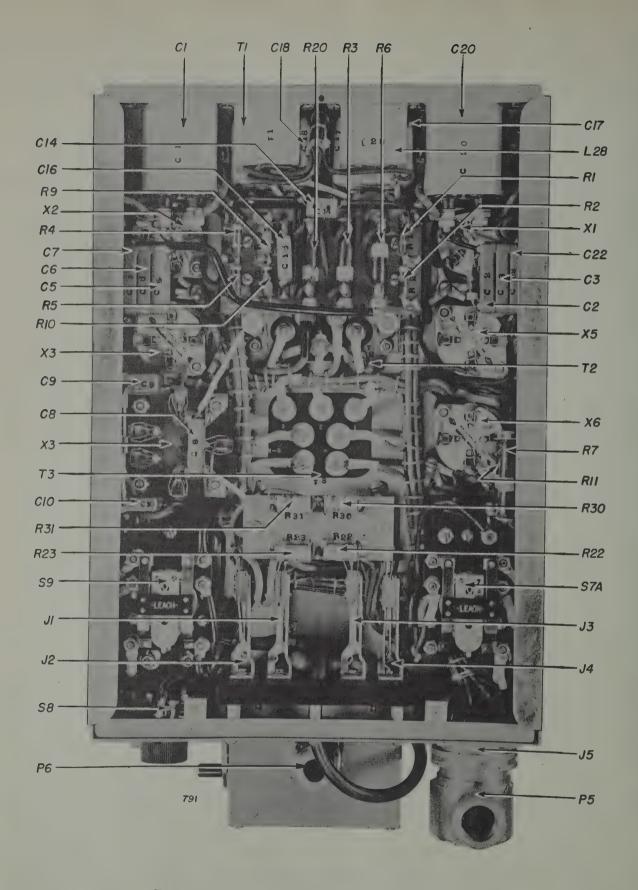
BOTTOM VIEW TYPE TA-2G TRANSMITTER
